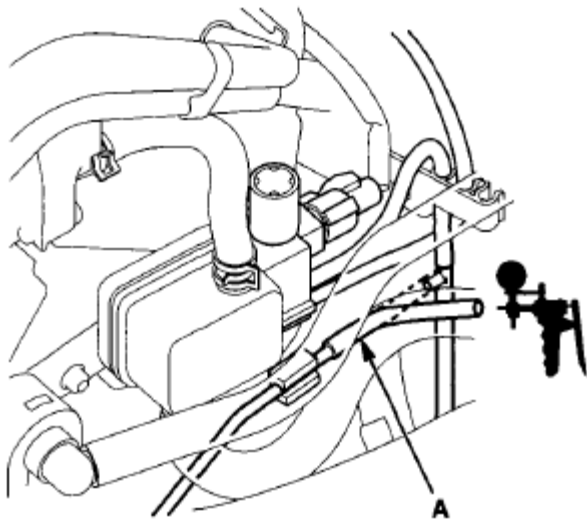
Identifying Vacuum Hose From Three Way Valve
